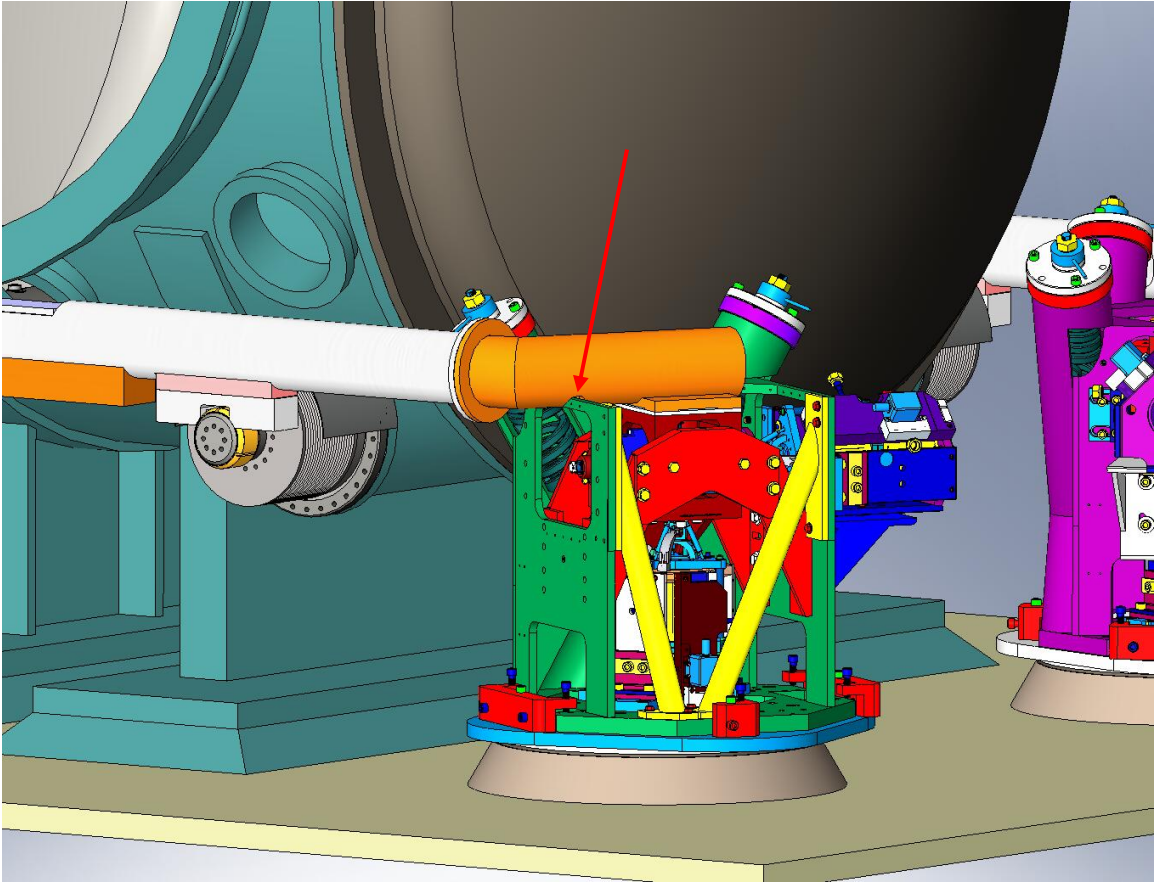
The arrow points to a notch cut into the High Crossbeam's Connector Tube. The notch provides clearance between the Tube and the HEPI Housing. This is a design detail that should be reconsidered if the High Crossbeam concept is chosen for Advanced LIGO.
